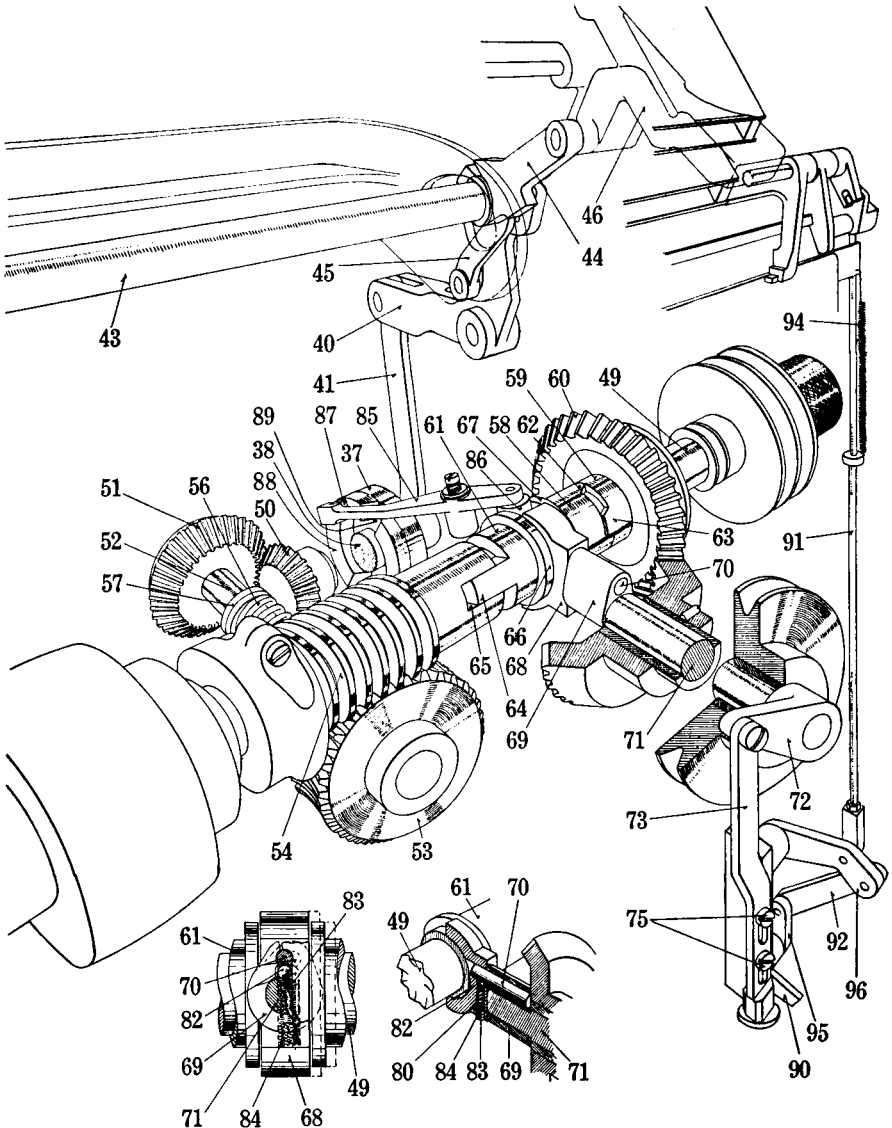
Plan view showing details of the clutch and related parts of the power magazine lift mechanism.
